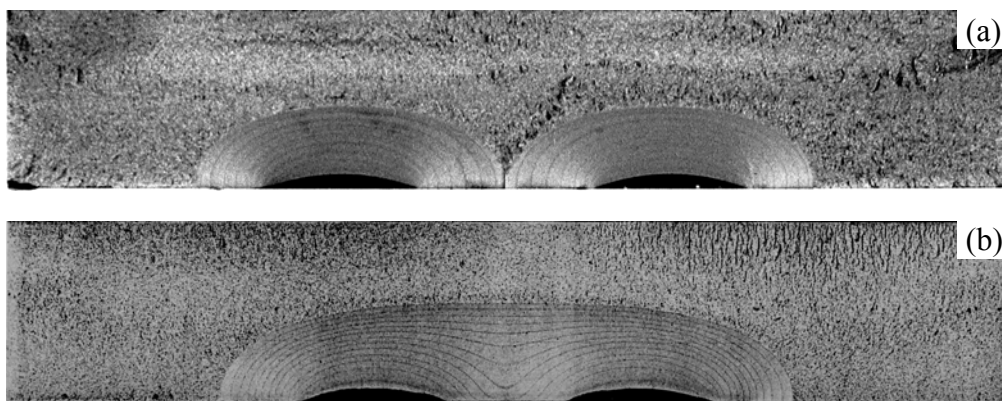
Fracture surface of test specimens with a complex defect and a bounding semi-elliptical defect
